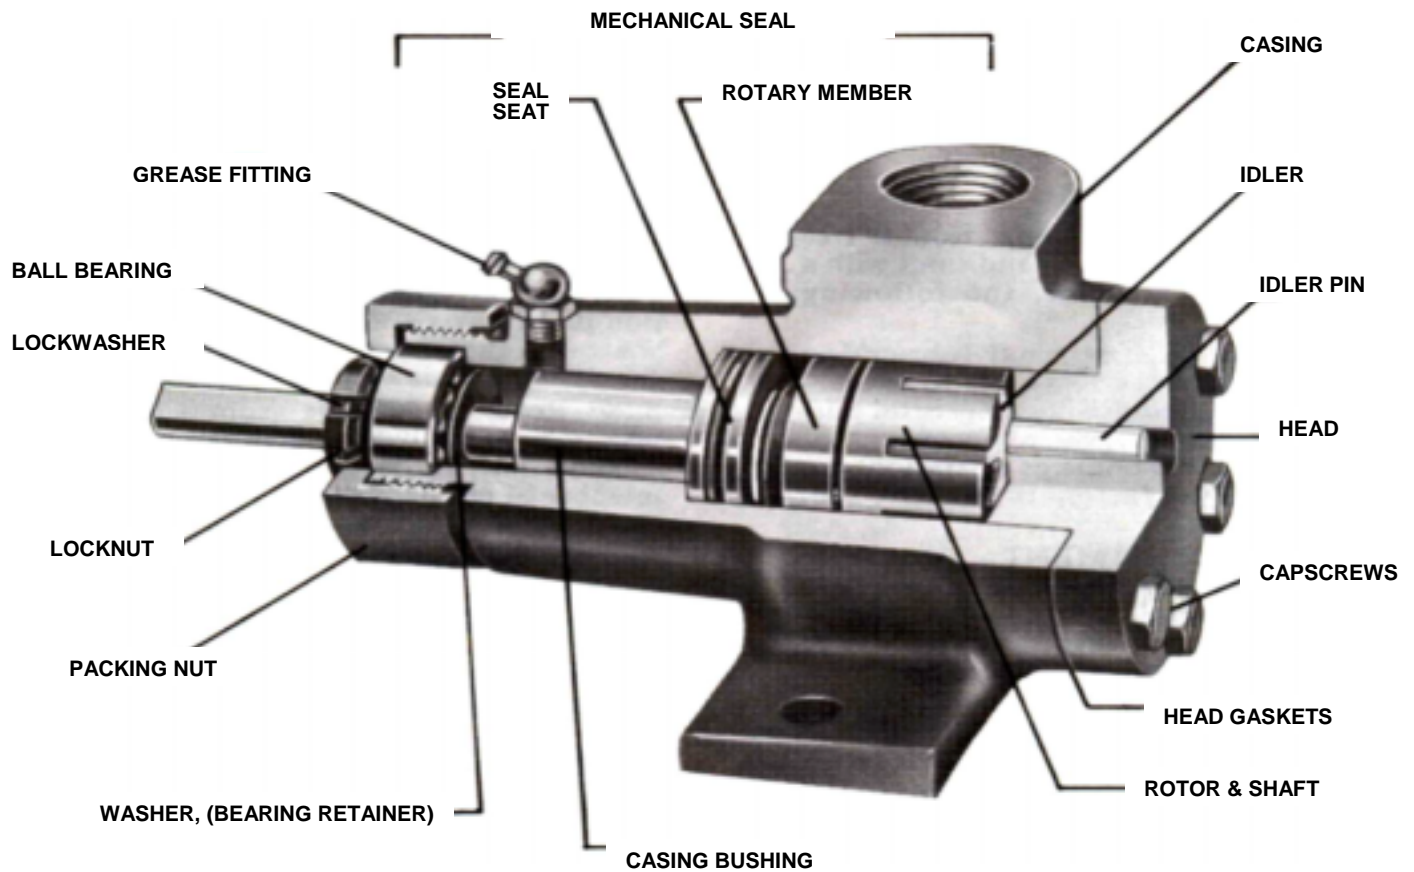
SECTIONAL VIEW OF SERIES 4625
